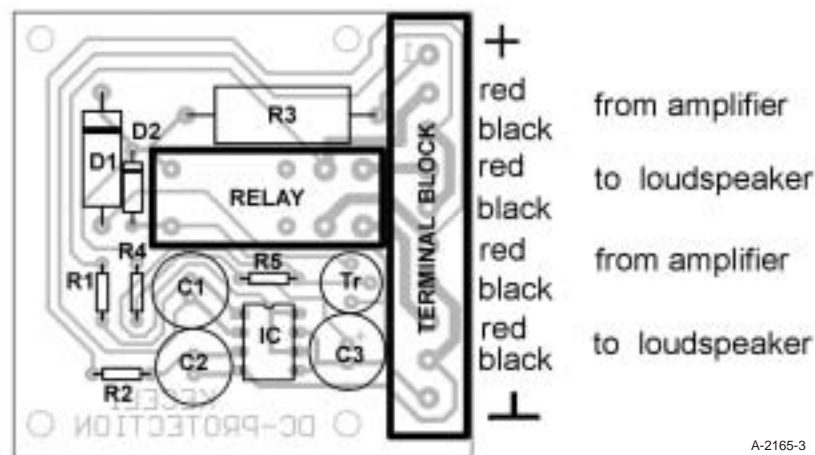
The soldering of the components on the printed circuit board. Component side.
